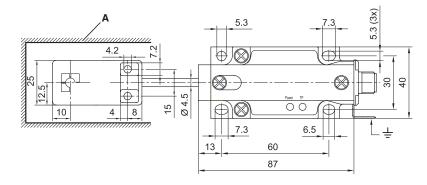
Processor BIS L-409-045-004-07-S4, dimensions in mm
